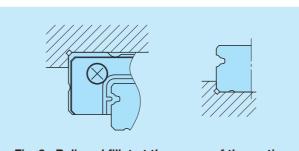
Relieved fillet at the corner of the mating reference mounting surfaces
